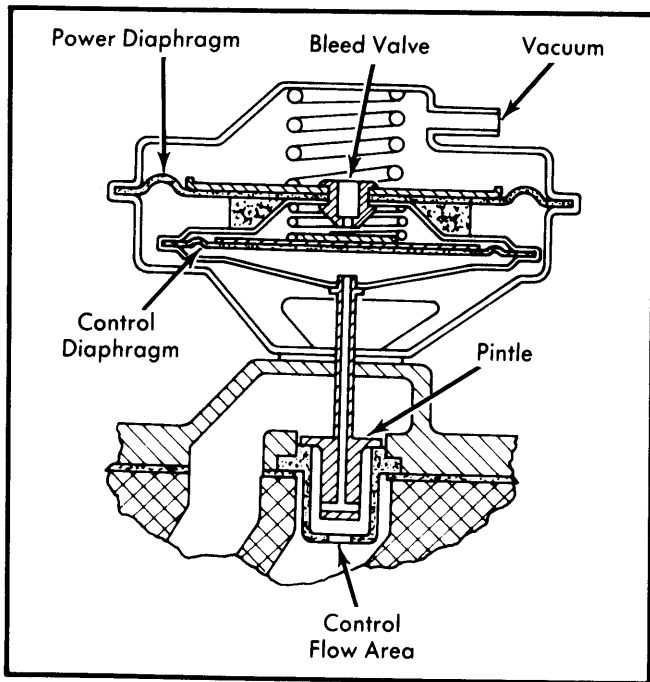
Cutaway View of EGR & Back-Pressure Sensor
